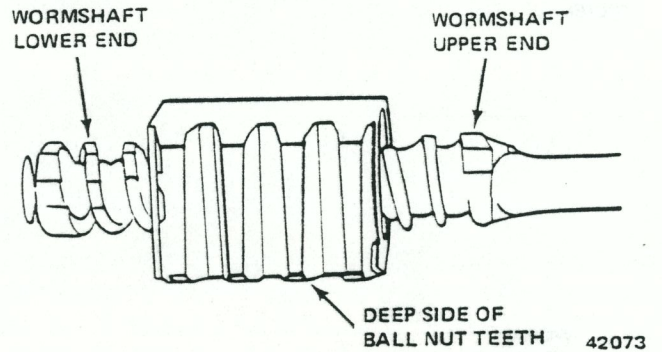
K-6 Positioning Wormshaft in Ball Nut
